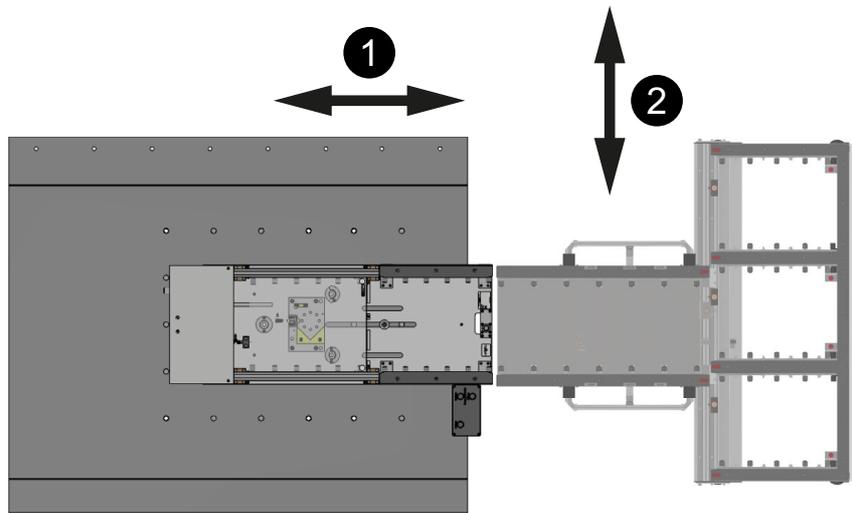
Loading table with ball rollers (illustration as an example)
